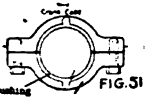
Illustration showing the main bearing cap and bearing bushing, which is babbitted lined. Shims between bearing cap and upper bearing not shown.
